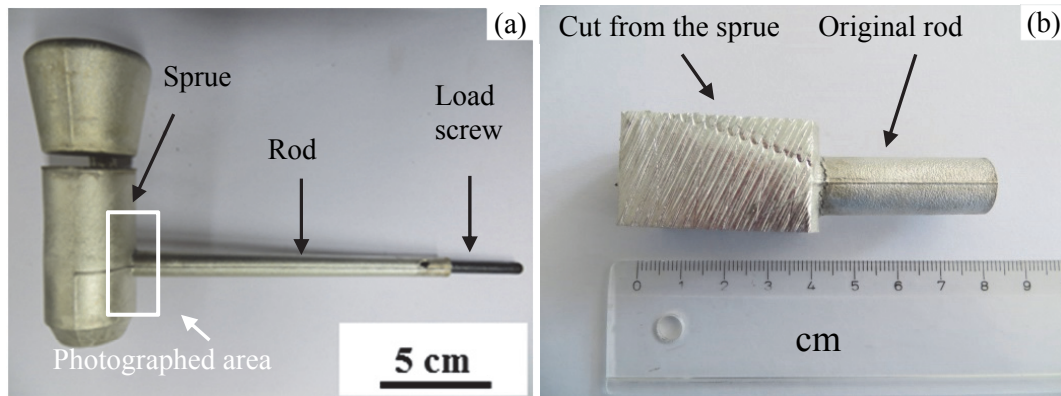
Photographs of (a) the CRC mold casting, (b) sample for X-ray tomography machined out of the casting
